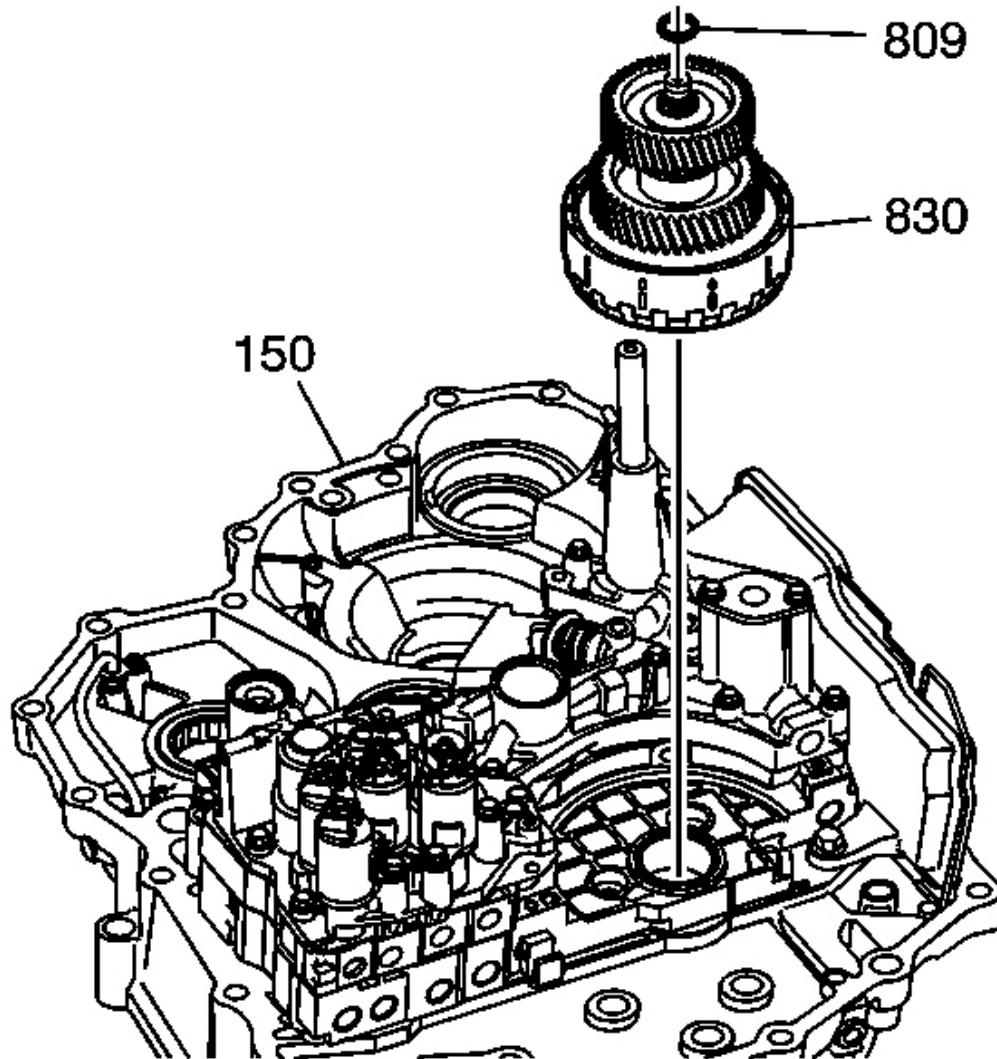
Selective Washer & 3rd Clutch Shaft Assembly
